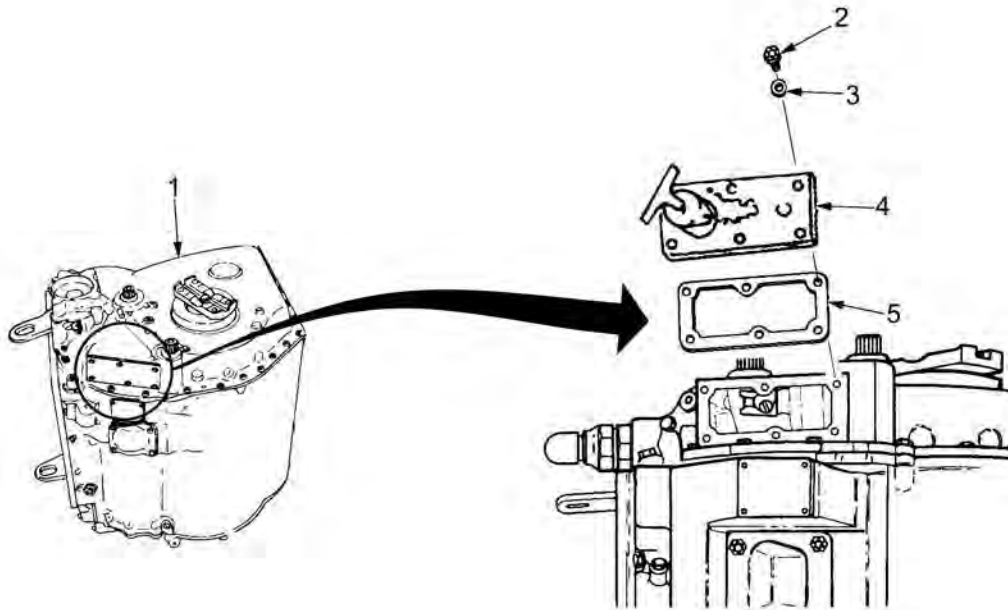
Right Brake Adjusting Cover and Gasket Removal.
